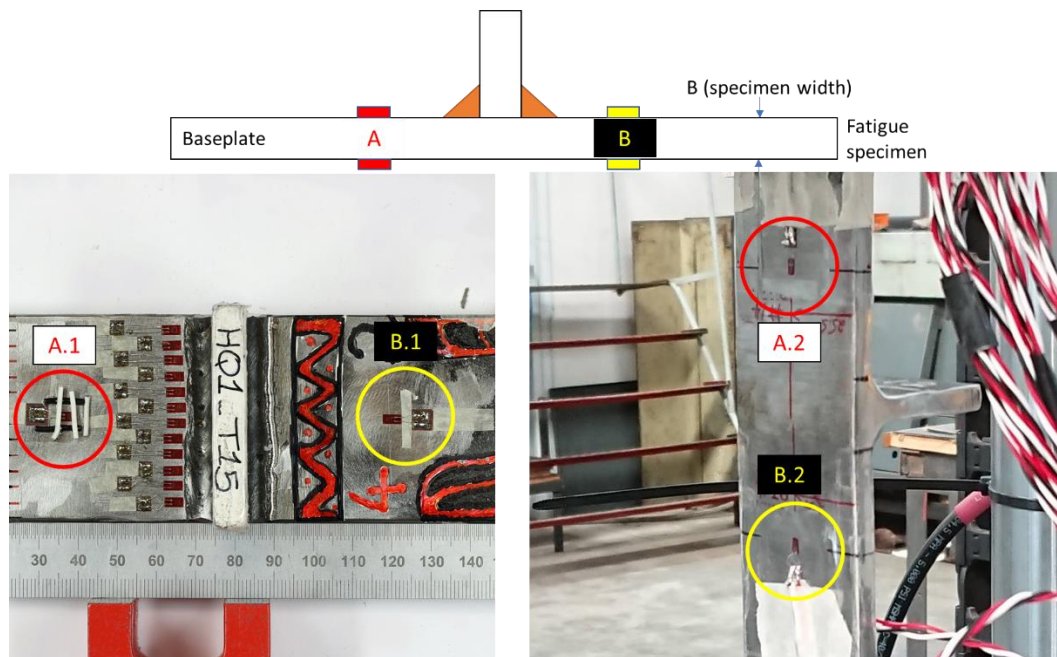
Schematic of the strain gauge setup for measuring weld misalignment in terms of bending stresses.
